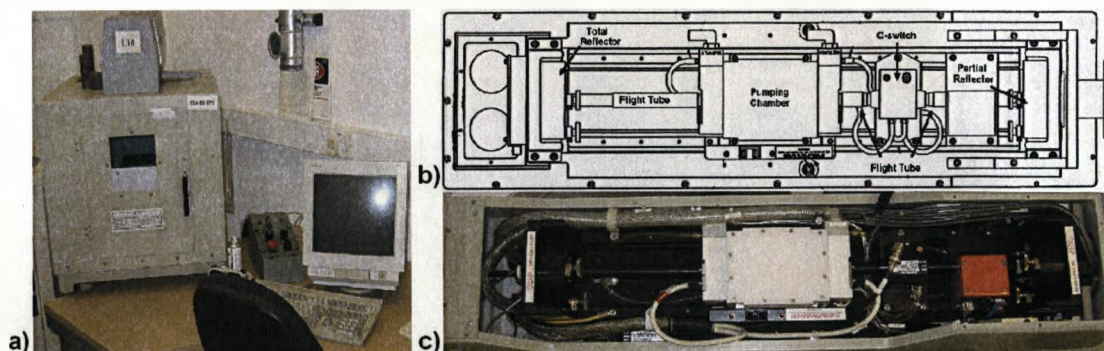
a) Image of system showing work-piece enclosure, galvanometer-head and laser head, b) schematic of laser head and c) Image of laser head internals
